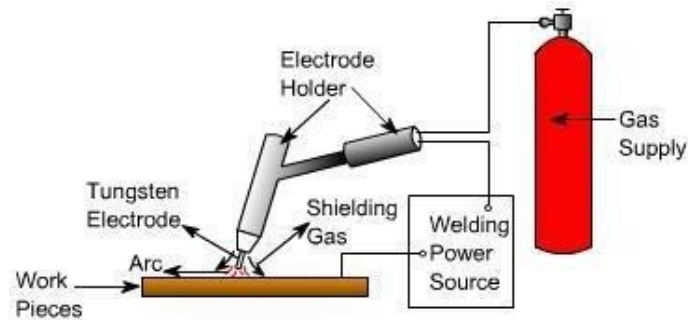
Schematic Diagram of TIG Welding System.
